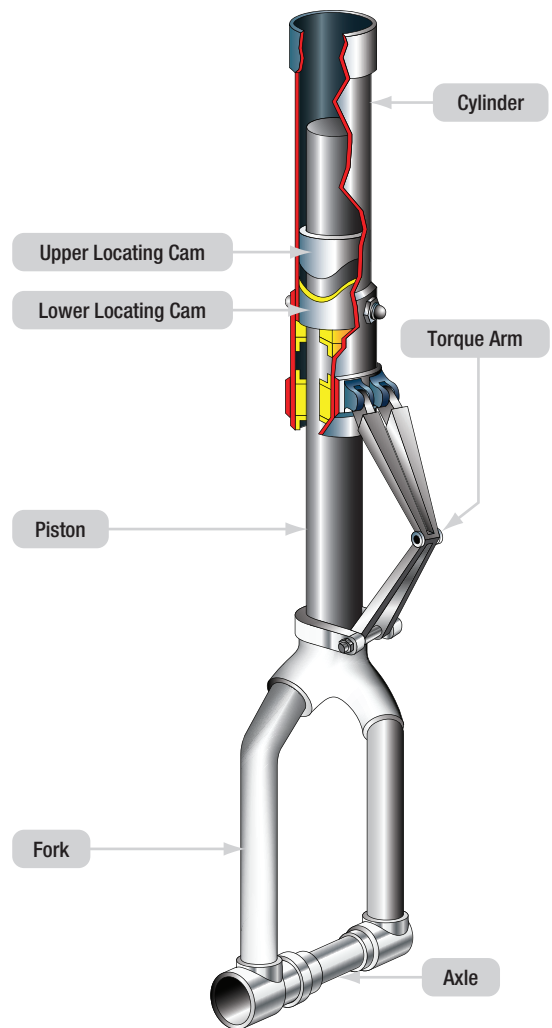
An upper locating cam mates into a lower cam recess when the nose landing gear shock strut is extended before landing and before the gear is retracted into the wheel well.
